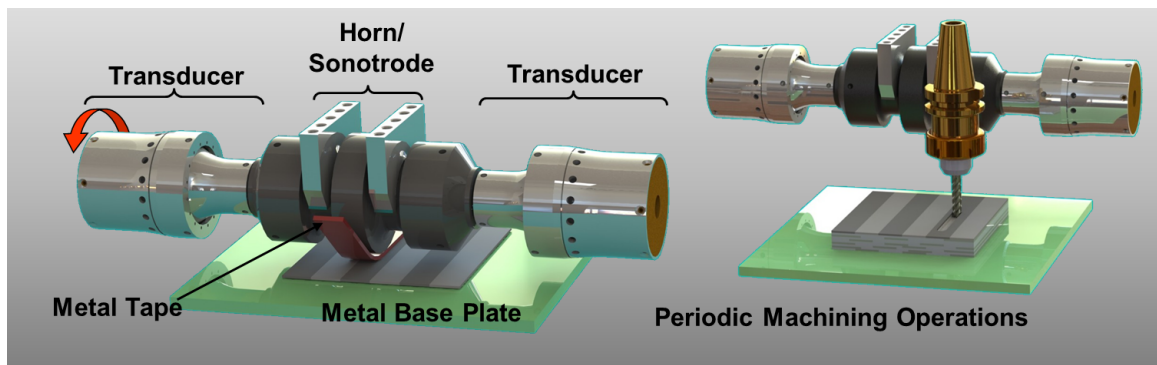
UAM system tools for ultrasonic welding and milling operations. (Courtesy of Fabrisonic)
